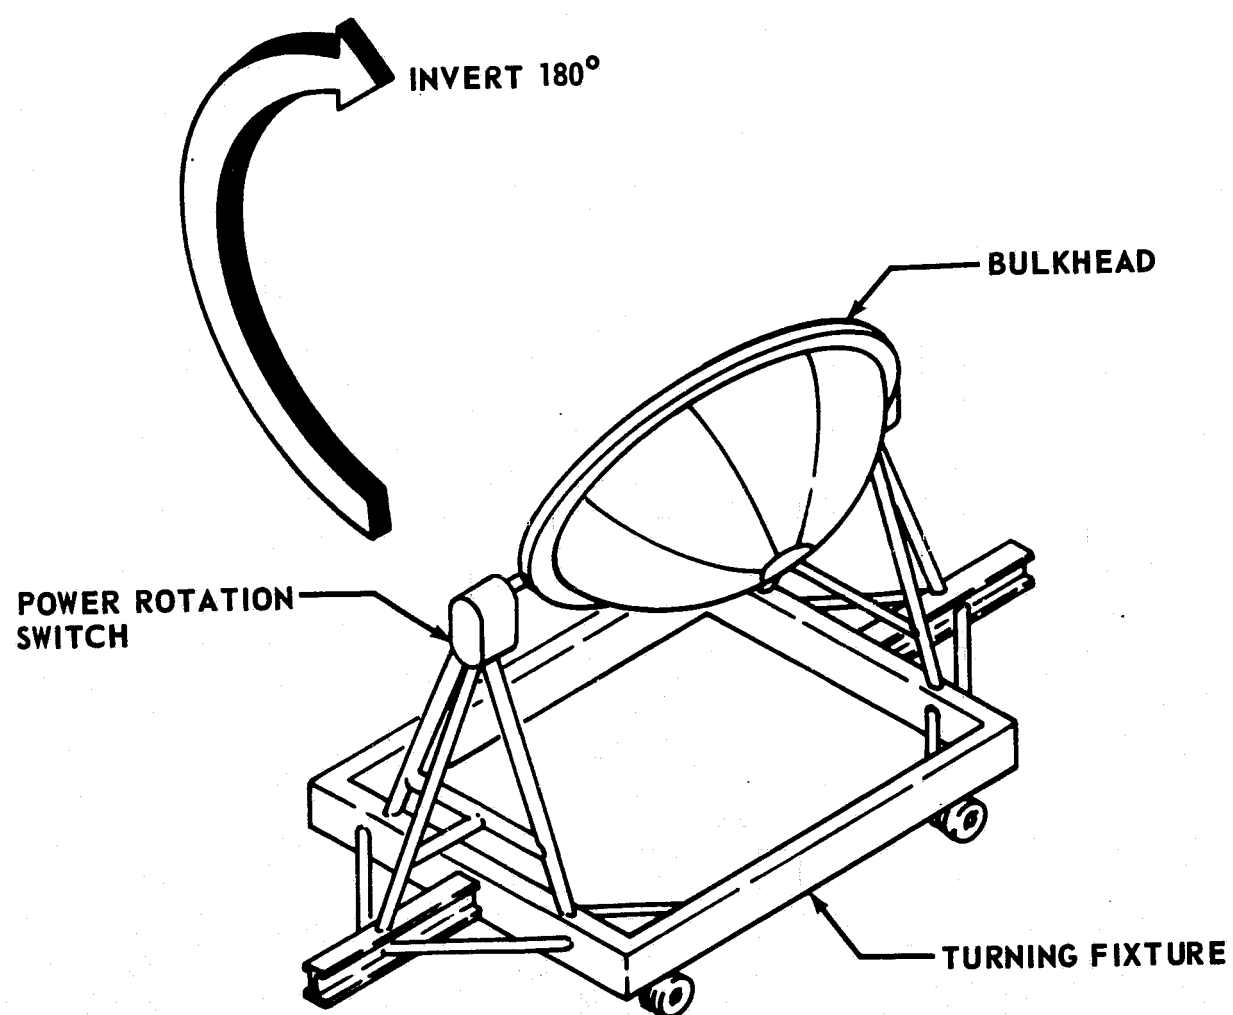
BULKHEAD INVERTING FIXTURE
